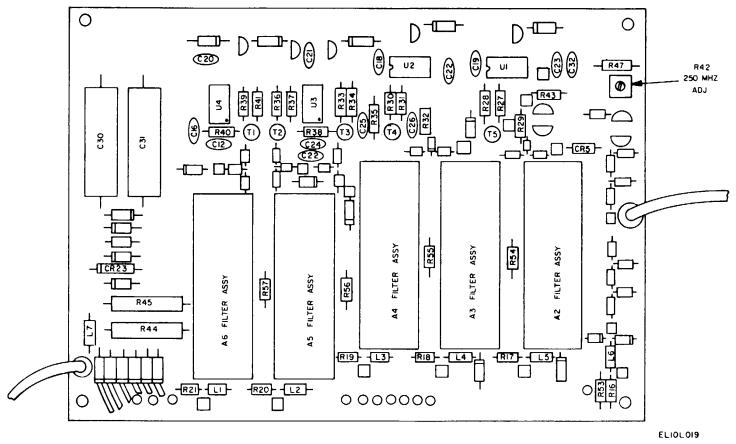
(1). Rf divider board A8A1, parts location (Sheet 1 of 2)
